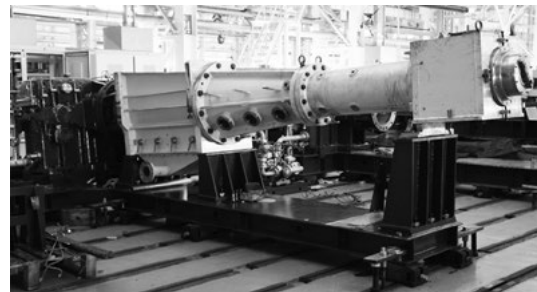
Double-supported rubber single screw extrusion dewatering unit
